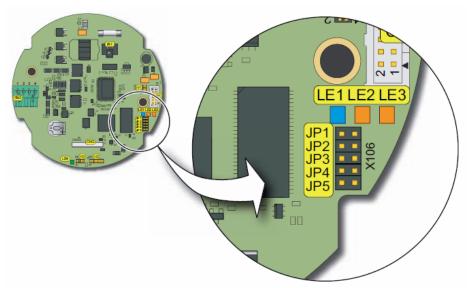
Lock the Device Password Read Protection by Jumper JP2
